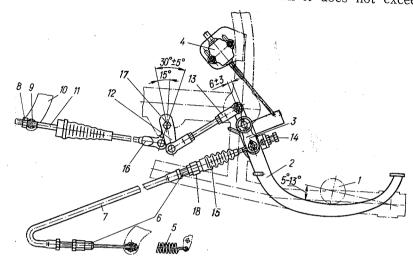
Brake linkage of rear wheel and sidecar wheel:
